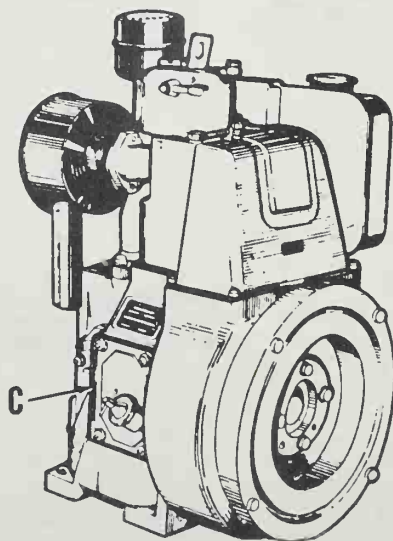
Remove cover (C) for access to connecting rod.
